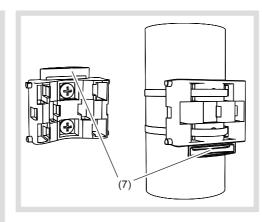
Wall fixing (left) or mast fixing (right) (7) crescent-shaped ba
